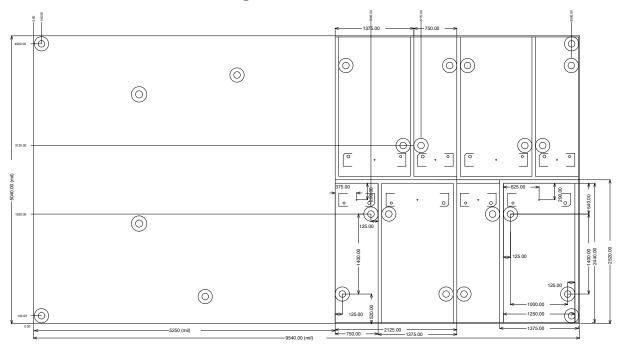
MDK-Pro-MB PCB Outline and Mounting Hole Locations (Top View, mils)
